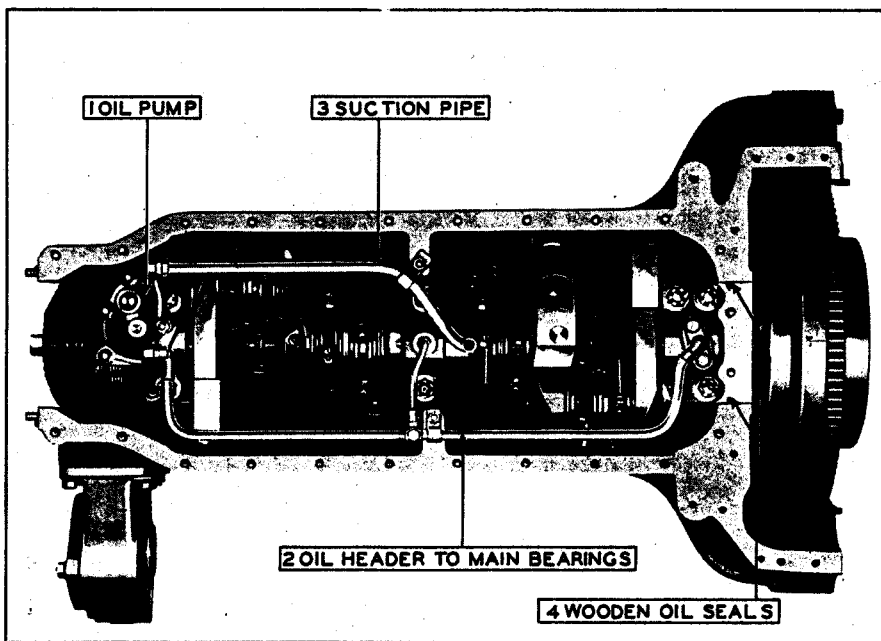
Bottom View of Engine, Oil Pan and Flywheel Cover Removed
